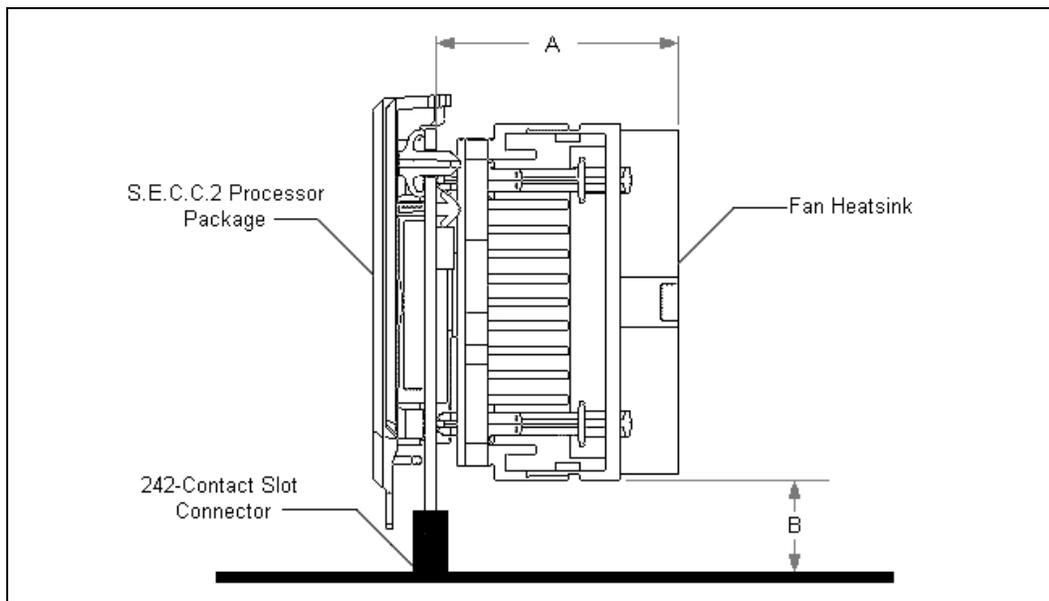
Front View Space Requirements for the Boxed Processor with S.E.C.C.2 Packaging
